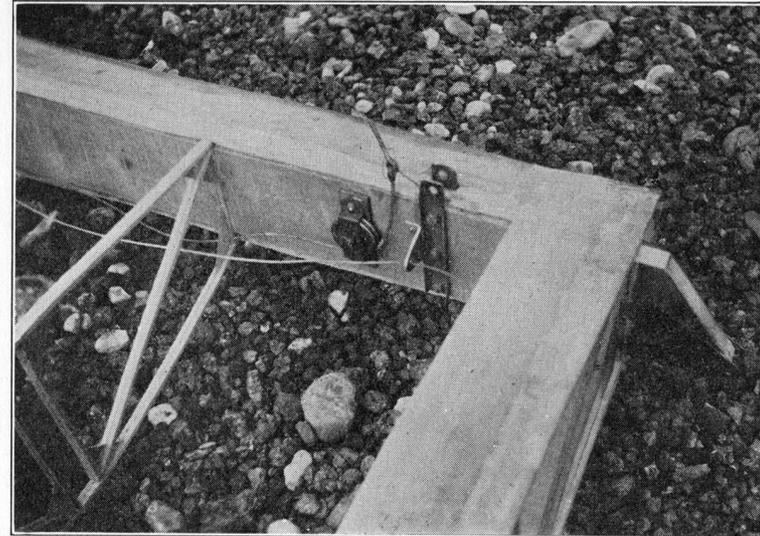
Plate XXVI. Center Section Strut Attachment Fitting and Aileron Pulley in Prüfling Wing
